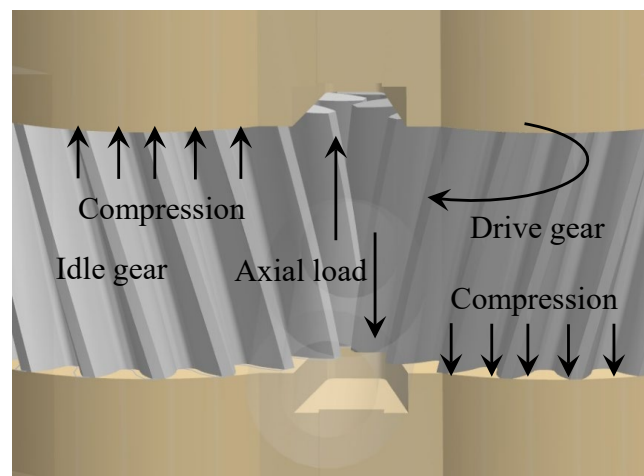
CAD rendering of the meshing of helical gears and the induced axial loading
